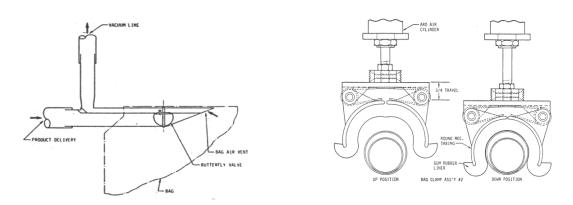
Engineering Controls, Bag Fill Nozzles
